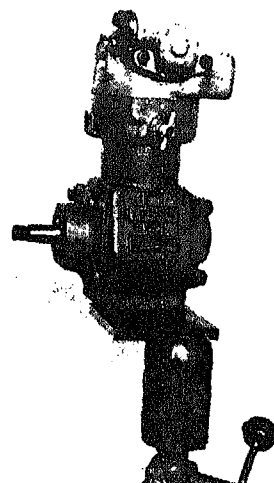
Mount compressor on ST-749 and ST-302
